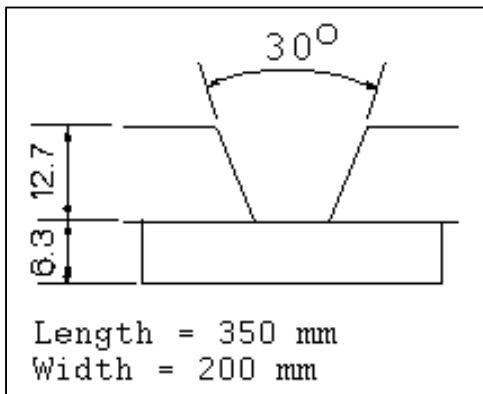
Shape and dimensions of the test-plate joint (plain carbon steel)
